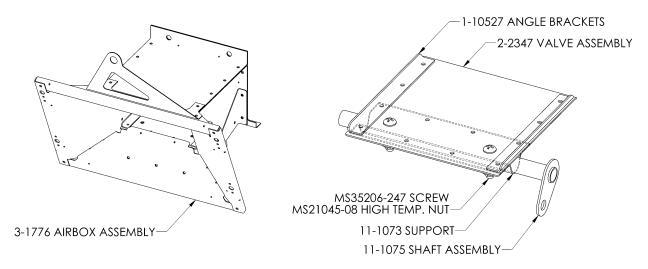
, Airbox Assembly / Valve and Shaft Assembly
